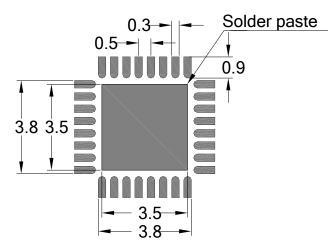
PD69200 Top layer Copper Recommended PCB Layout (mm)
